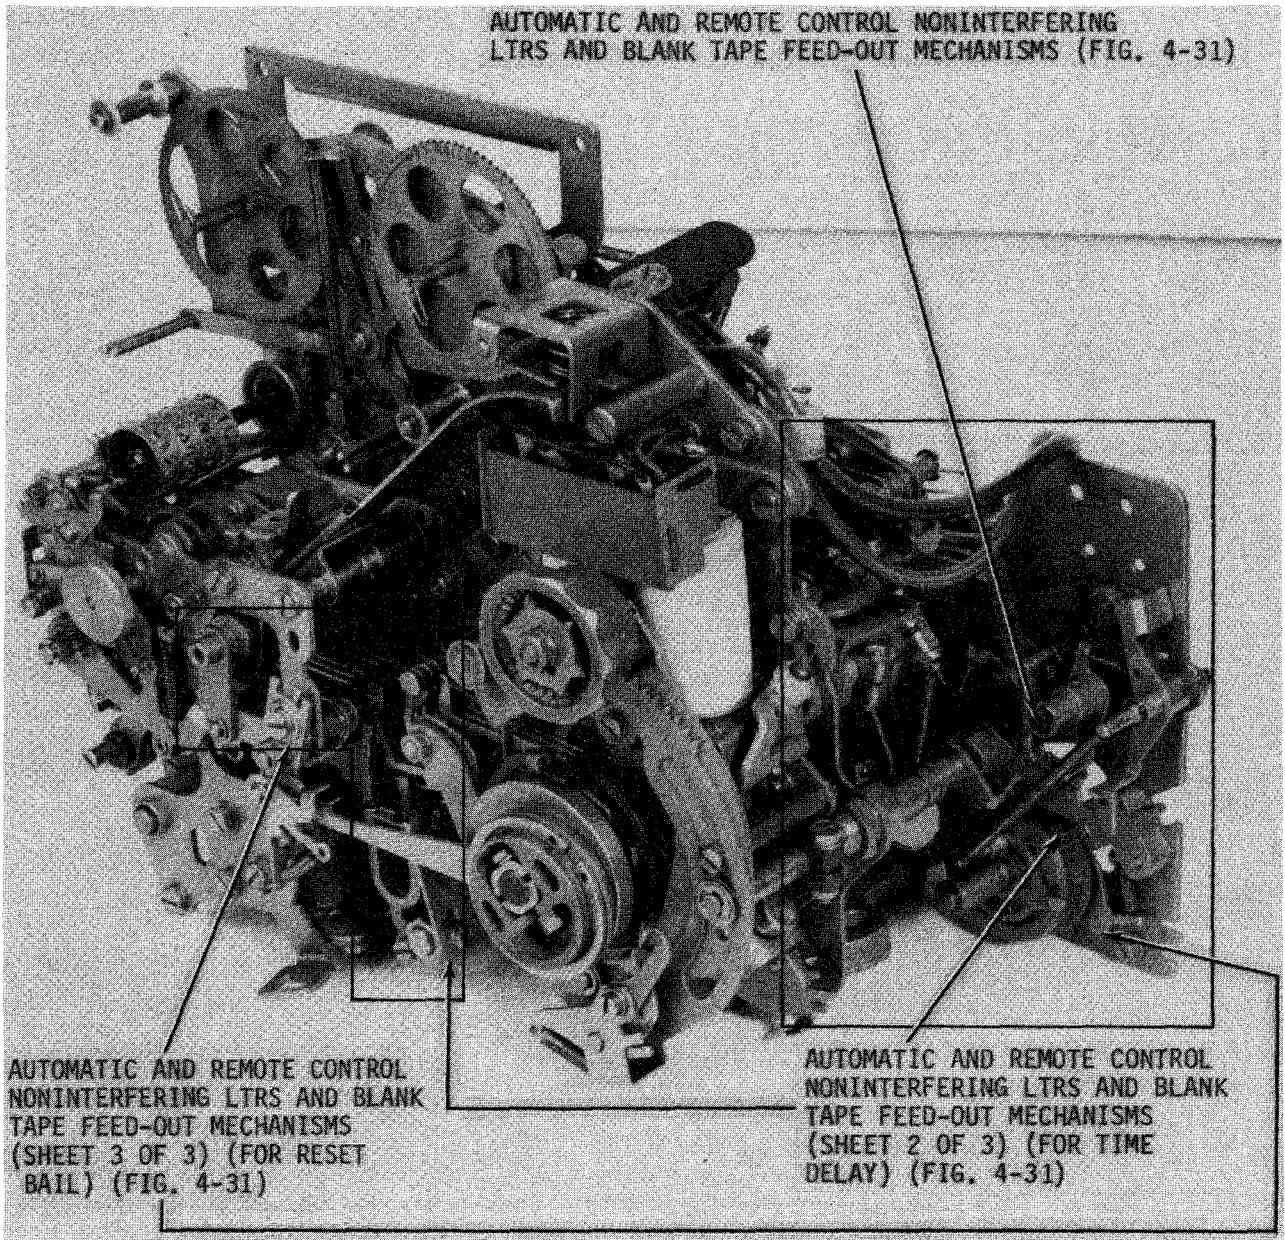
Automatic and Remote Control Noninterfering LTRS Tape Feed-Out Mechanisms, Right Front View
